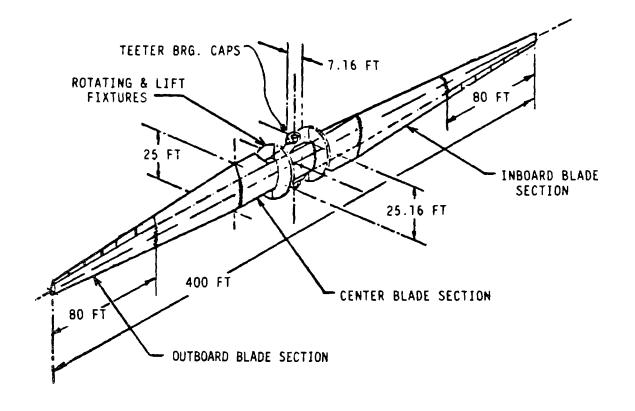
Rotor Erection Module Weight with Lifting Fixtures: 530,000 lbs.
